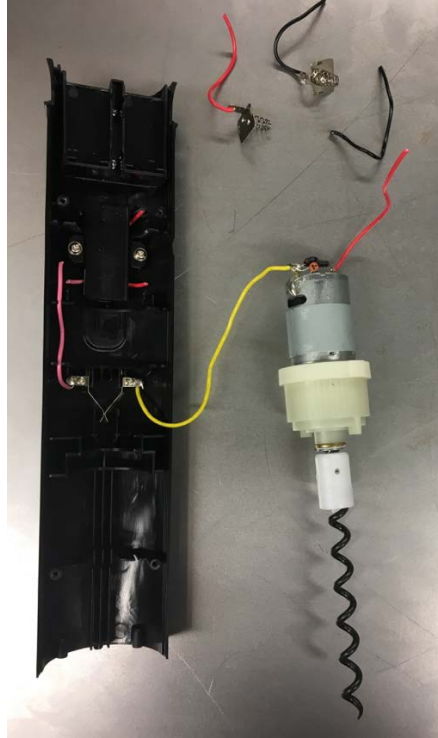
CORKSCREW CUT AND REMOVED WIRES
